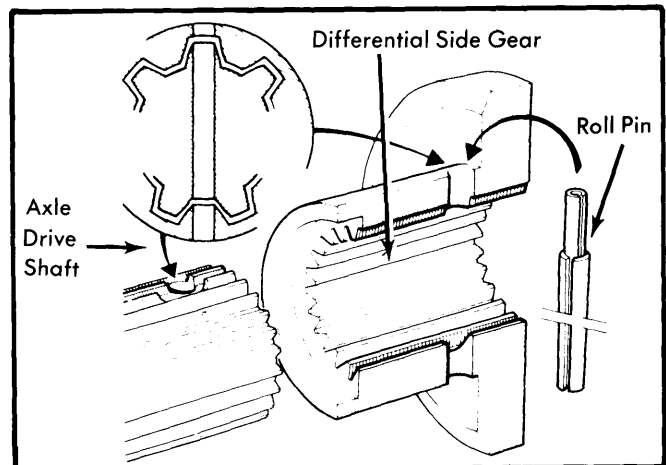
Axle Drive Shaft Alignment Using New Roll Pin Assembly
